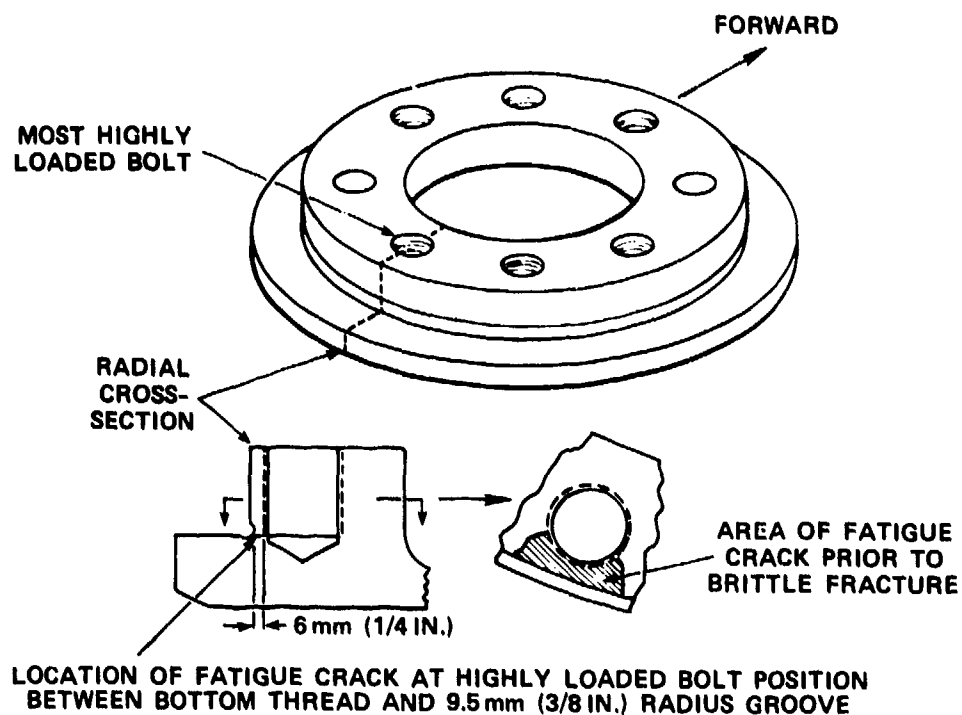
Fatigue Failure in USS BARBEY Crank Ring
